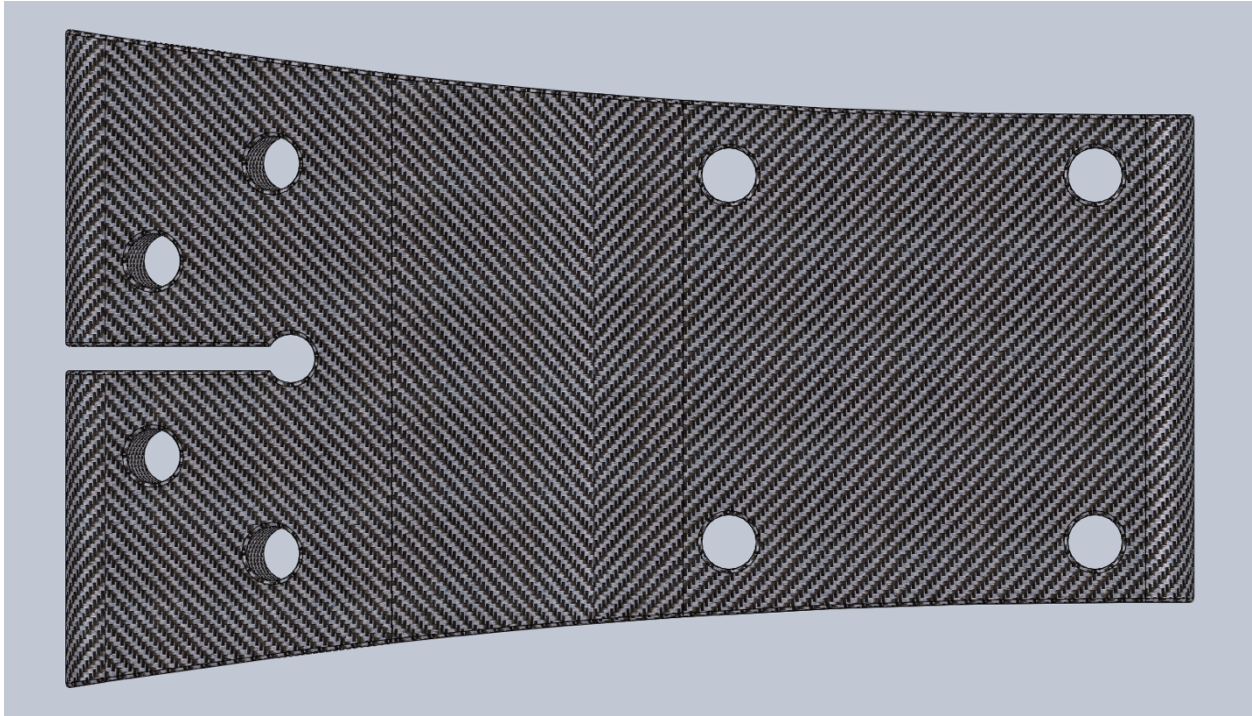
Upper Foot Plate Top View (Housing Attachment Bracket Connection)
